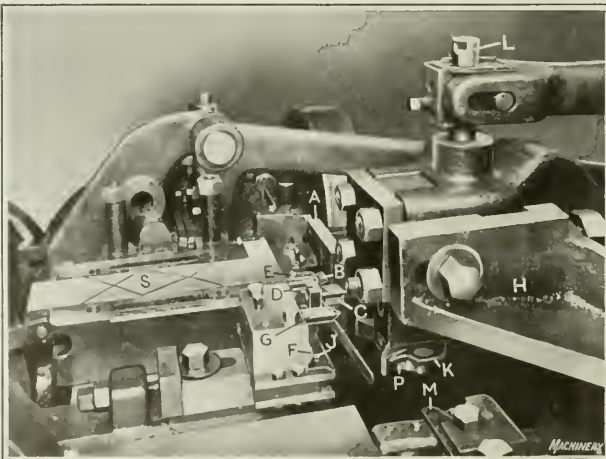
Right-hand Side of a Wire-forming Machine equipped with a Punch Press Attachment and Dies for forming Ribbon Stock
